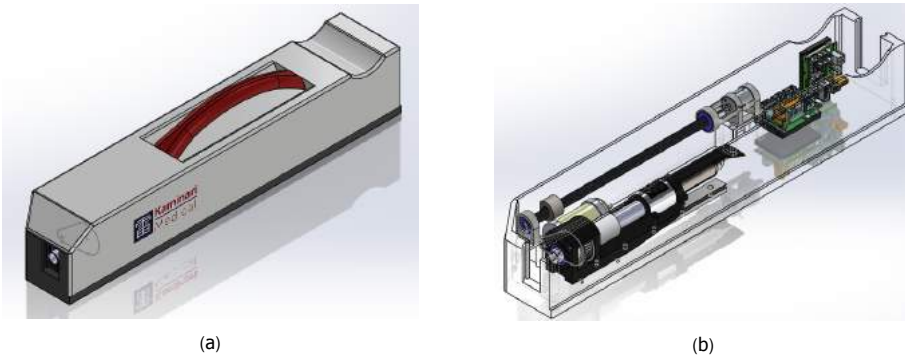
The third iteration of the pullback device. (a): Isometric view of the housing of this pullback device. (b): Isometric view of the inner mechanics of this pullback device.
